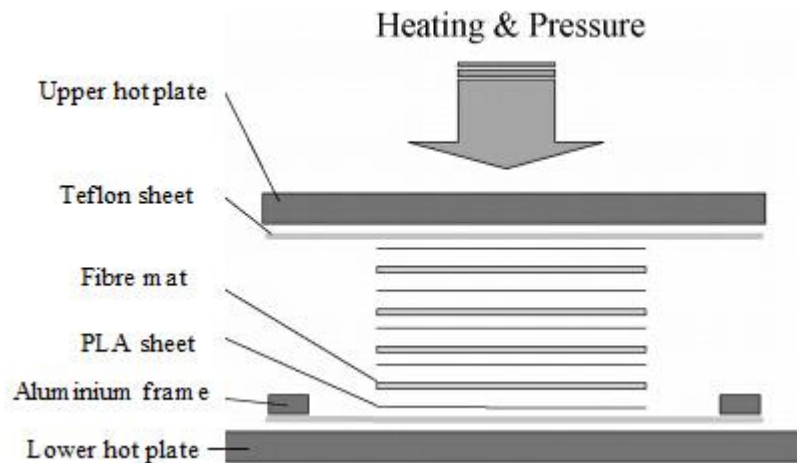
Hot Press Moulding of Fibre Mat Composite [57].
